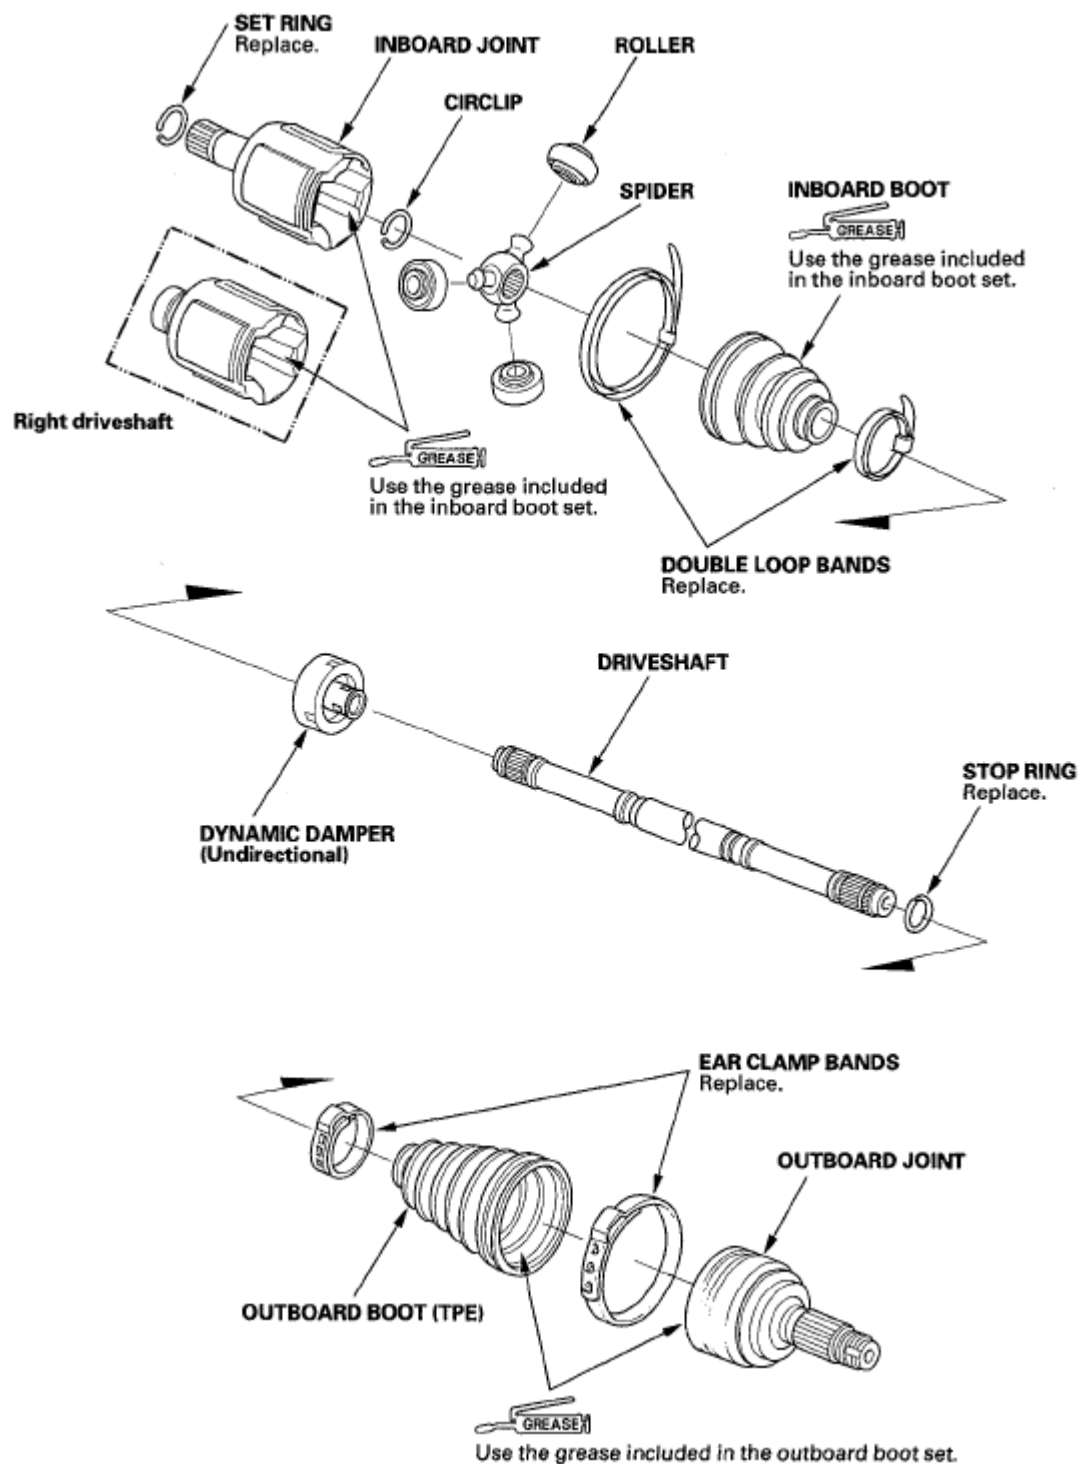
Exploded View Of Front Driveshaft With Grease Application Areas
